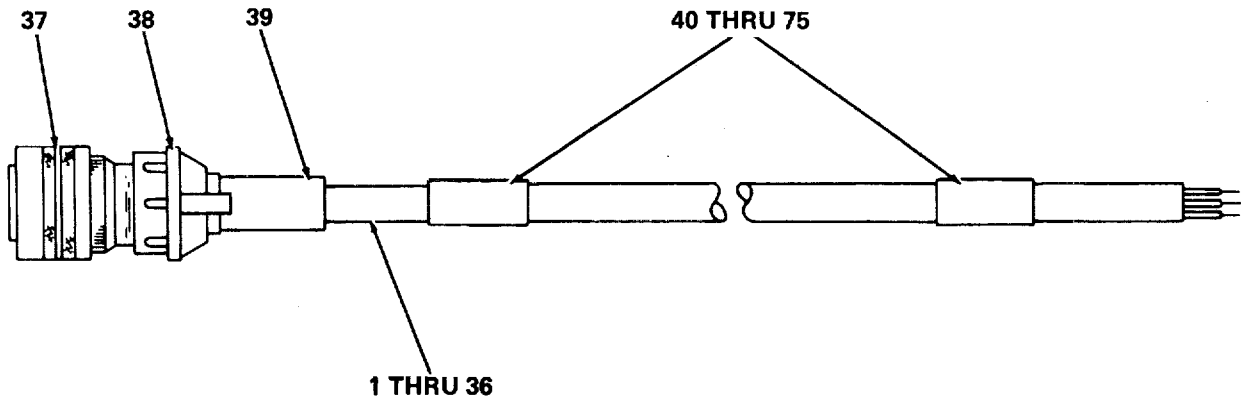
Cable Assemblies 1703-1-3130 (GR1-GR36)
